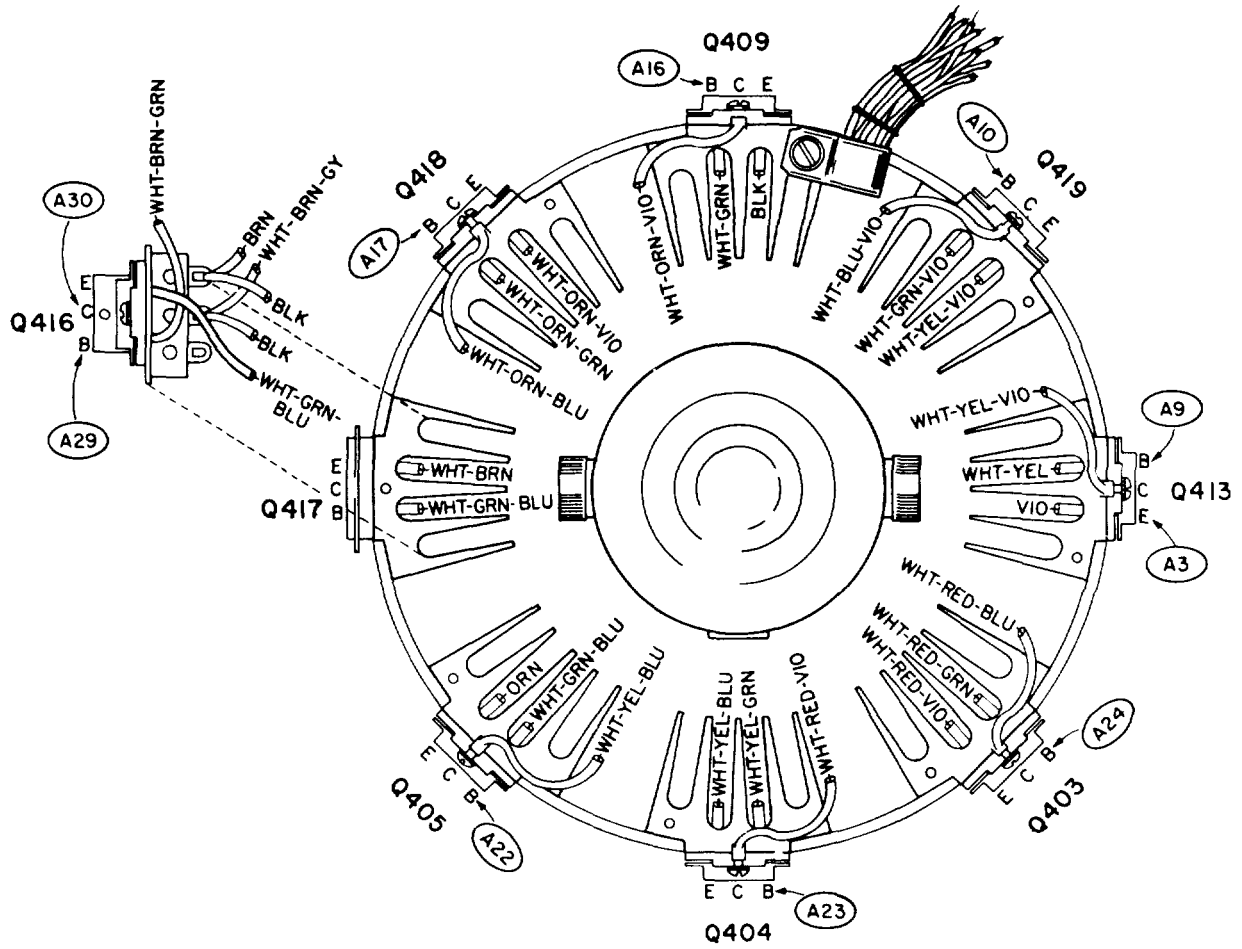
Fan Shroud and Power Transistor Assembly, Location of Test Points and Connections
